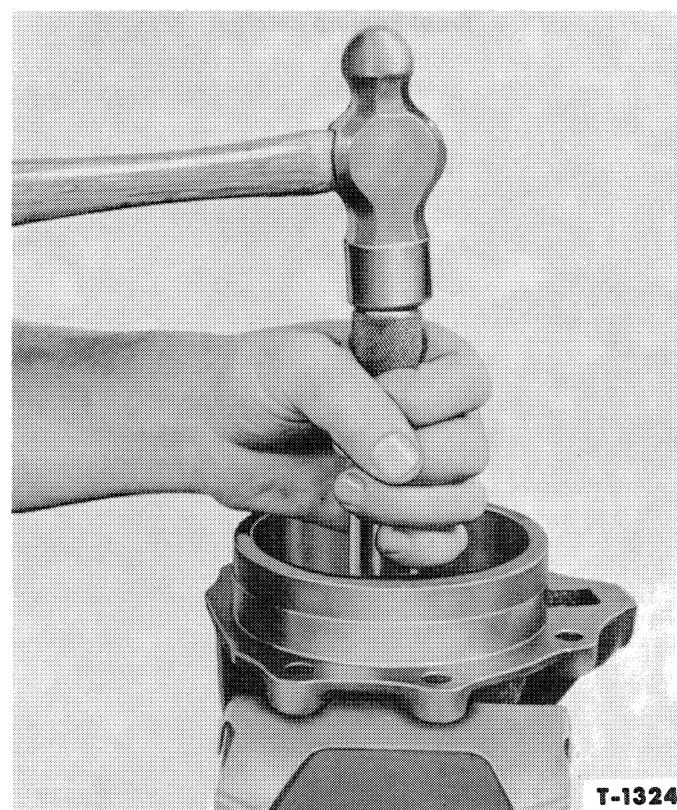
Installing Oil Seal in Output Shaft Bearing Retainer
